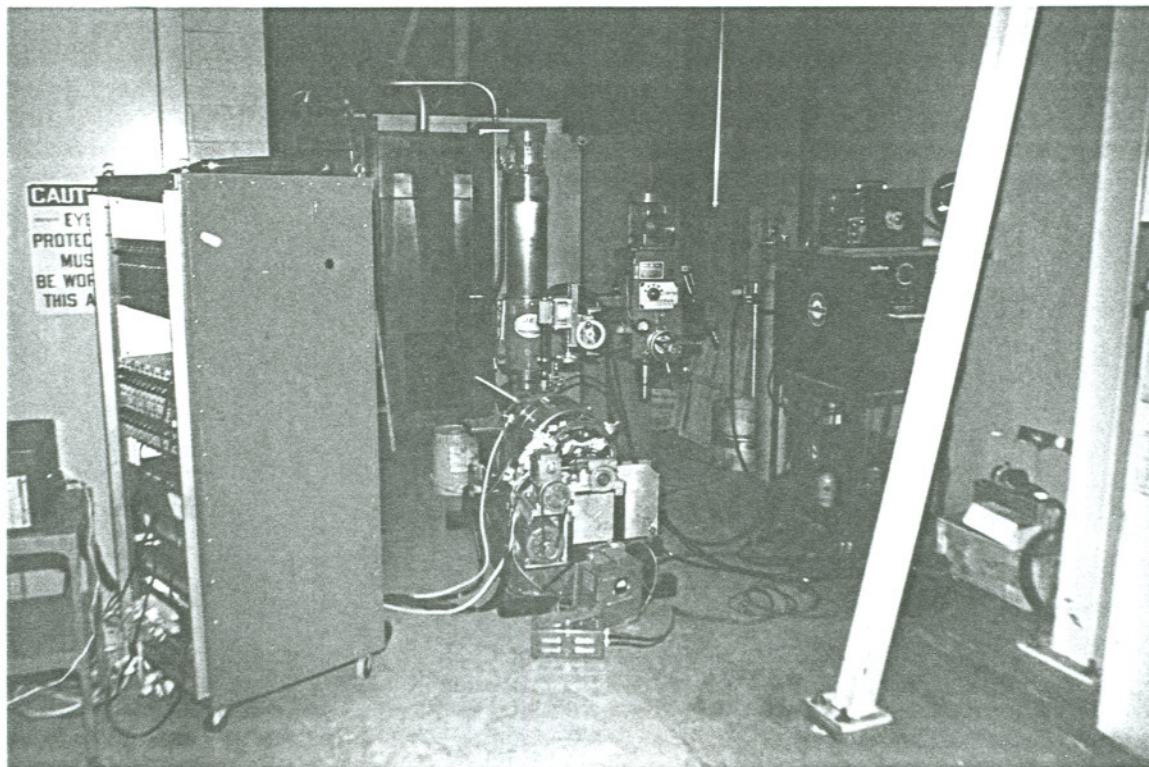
Setup for Pipe Weld Made at OGI
